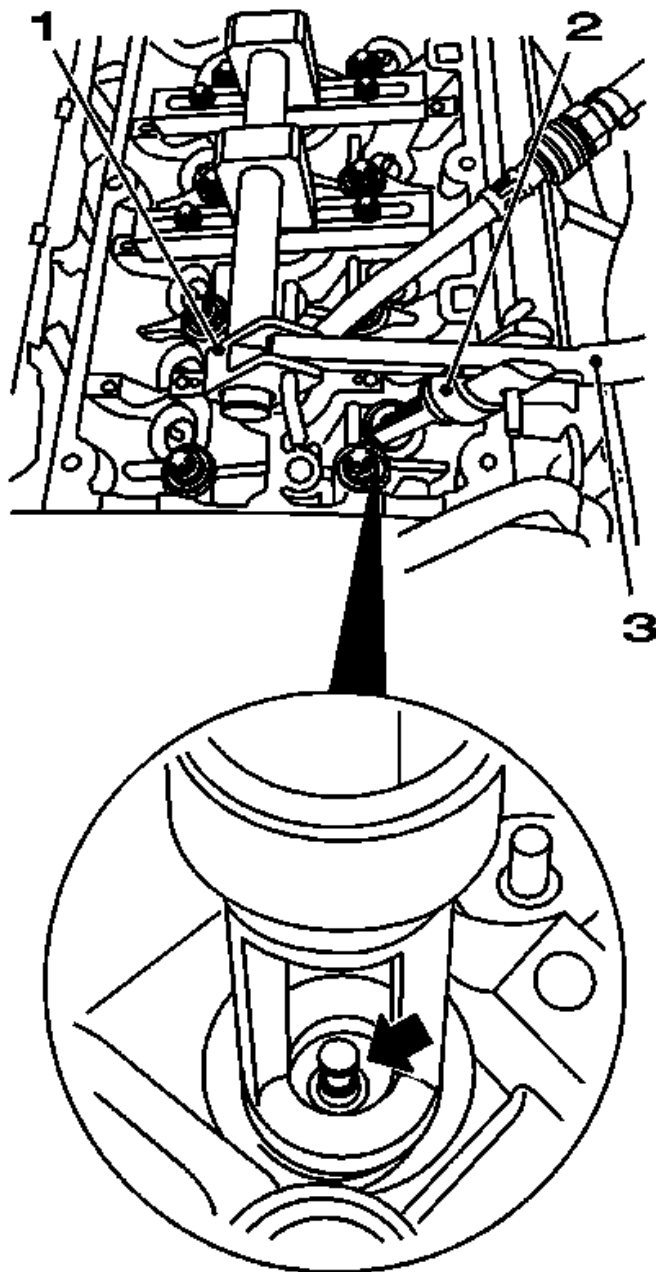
View Of MKM-6086-8 Joint, MKM-6086-11 Removal Head And MKM-6086-7 Lever Arm
